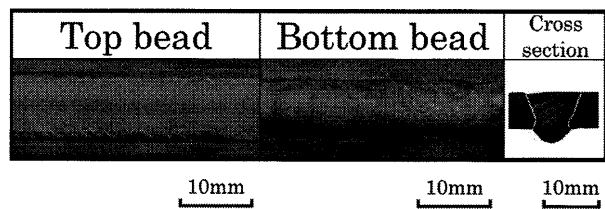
Bead appearance and cross section of welded joint.
